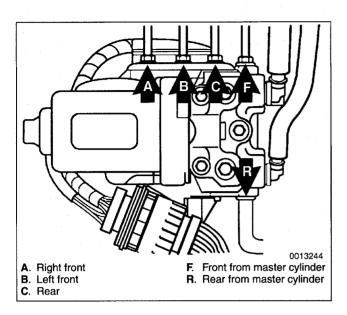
Brake fluid lines at ABS hydraulic unit.
